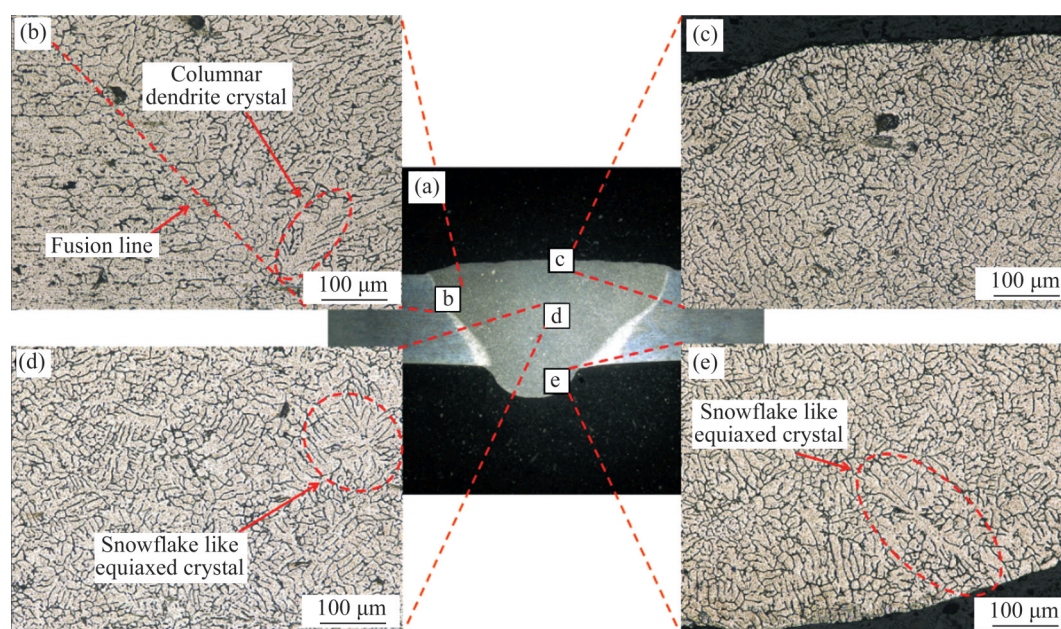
Morphology of the weld bead taken by OM: (a) Macro morphology of weld bead; (b) Microstructure of fusion zone; (c) Microstructure of the upper part of weld bead; (d) Microstructure of the middle part of weld bead; (e) Microstructure of the lower part of weld bead
